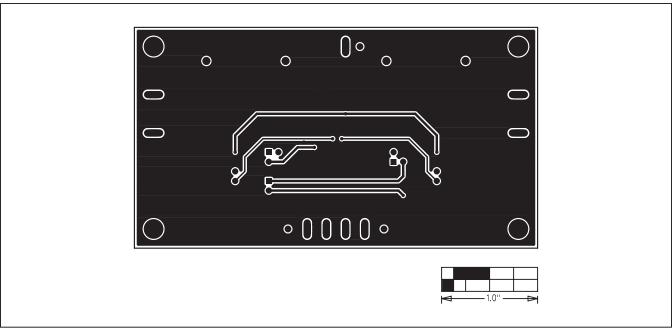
MAX16948 EV Kit PCB Layout—Solder Side
